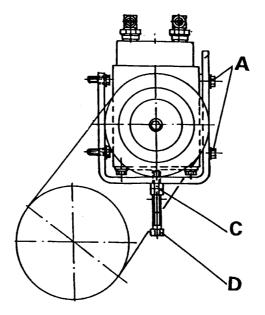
Tension Adjustment of Air Conditioner Compressor Belt
